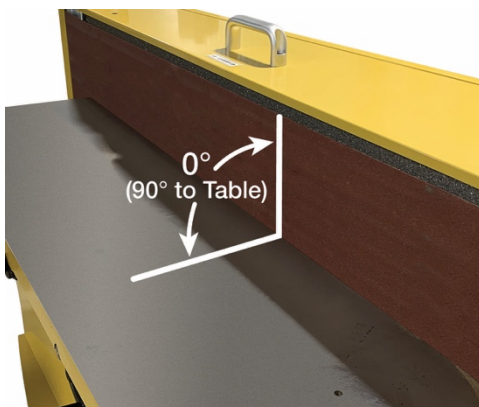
Adjusting Sanding Belt to 0° (90° to table)
